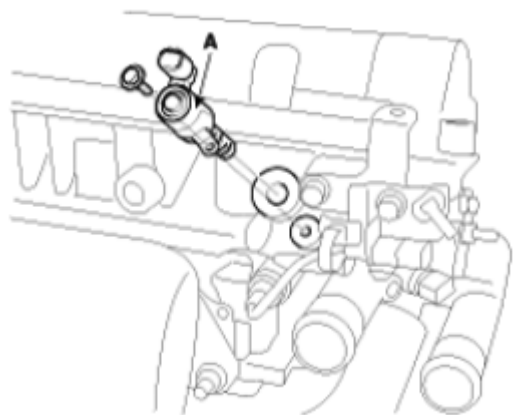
Identifying Timing Chain Auto Tensioner
